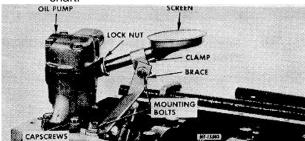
Oil Pump Mounting Details for Engines Below Serial No. 51135
